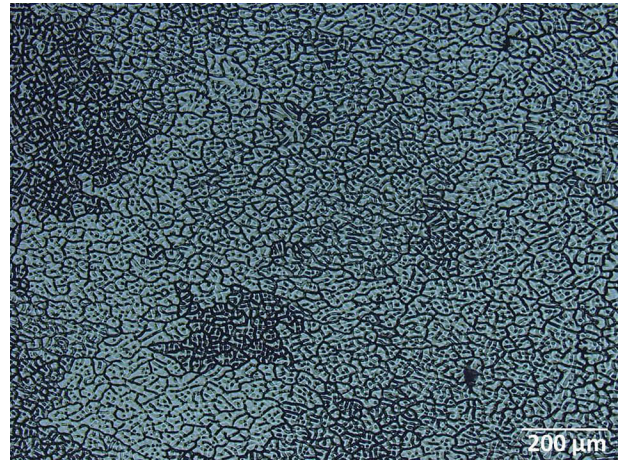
Weld bead of AA2195-T87 welded by GTAW with AA2319 filler wire. A fine dendritic structure is noticed. The etchant is Keller's reagent
